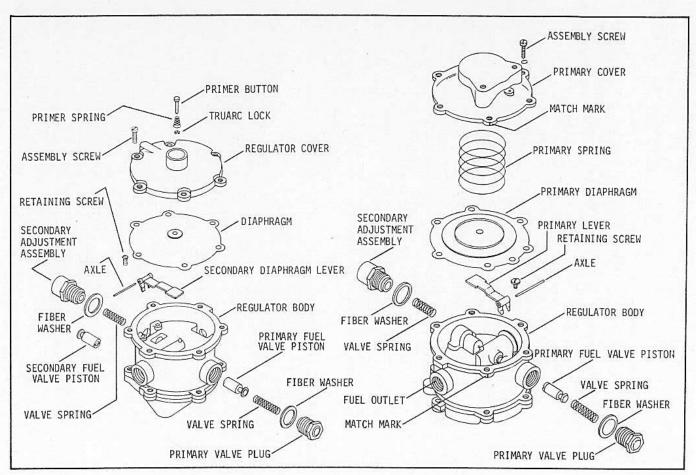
DISASSEMBLY TWO STAGE REGULATOR
